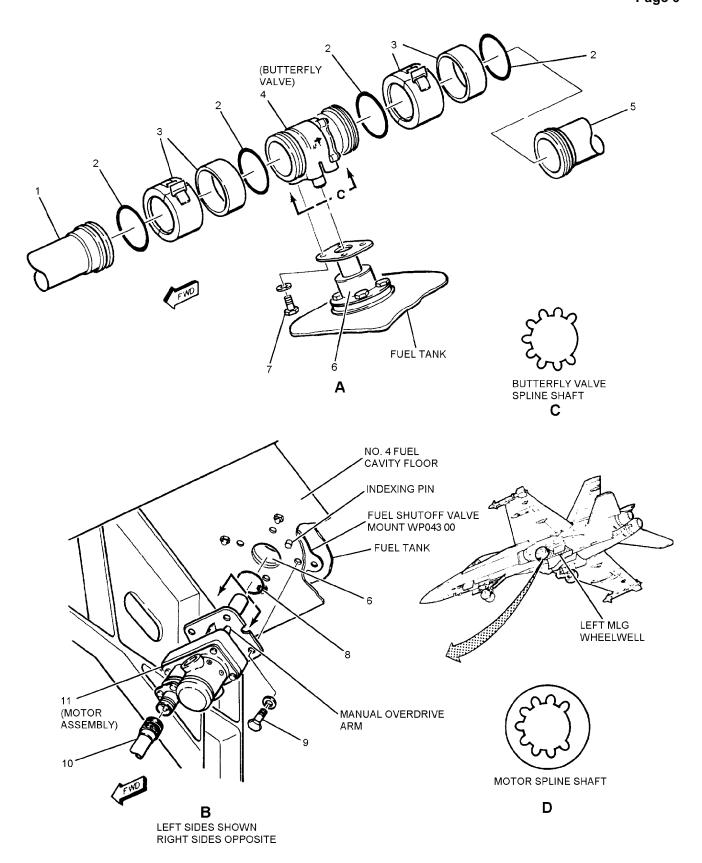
Engine Fuel Shutoff Valve (5B-P072 or 5B-R070) (Sheet 2)
